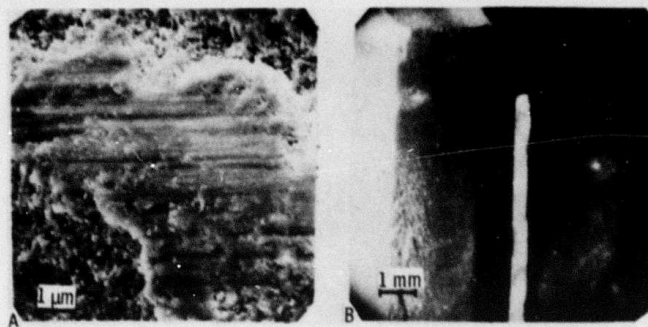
Large Inclusions Causing Premature Failures in Fatigue Specimens
